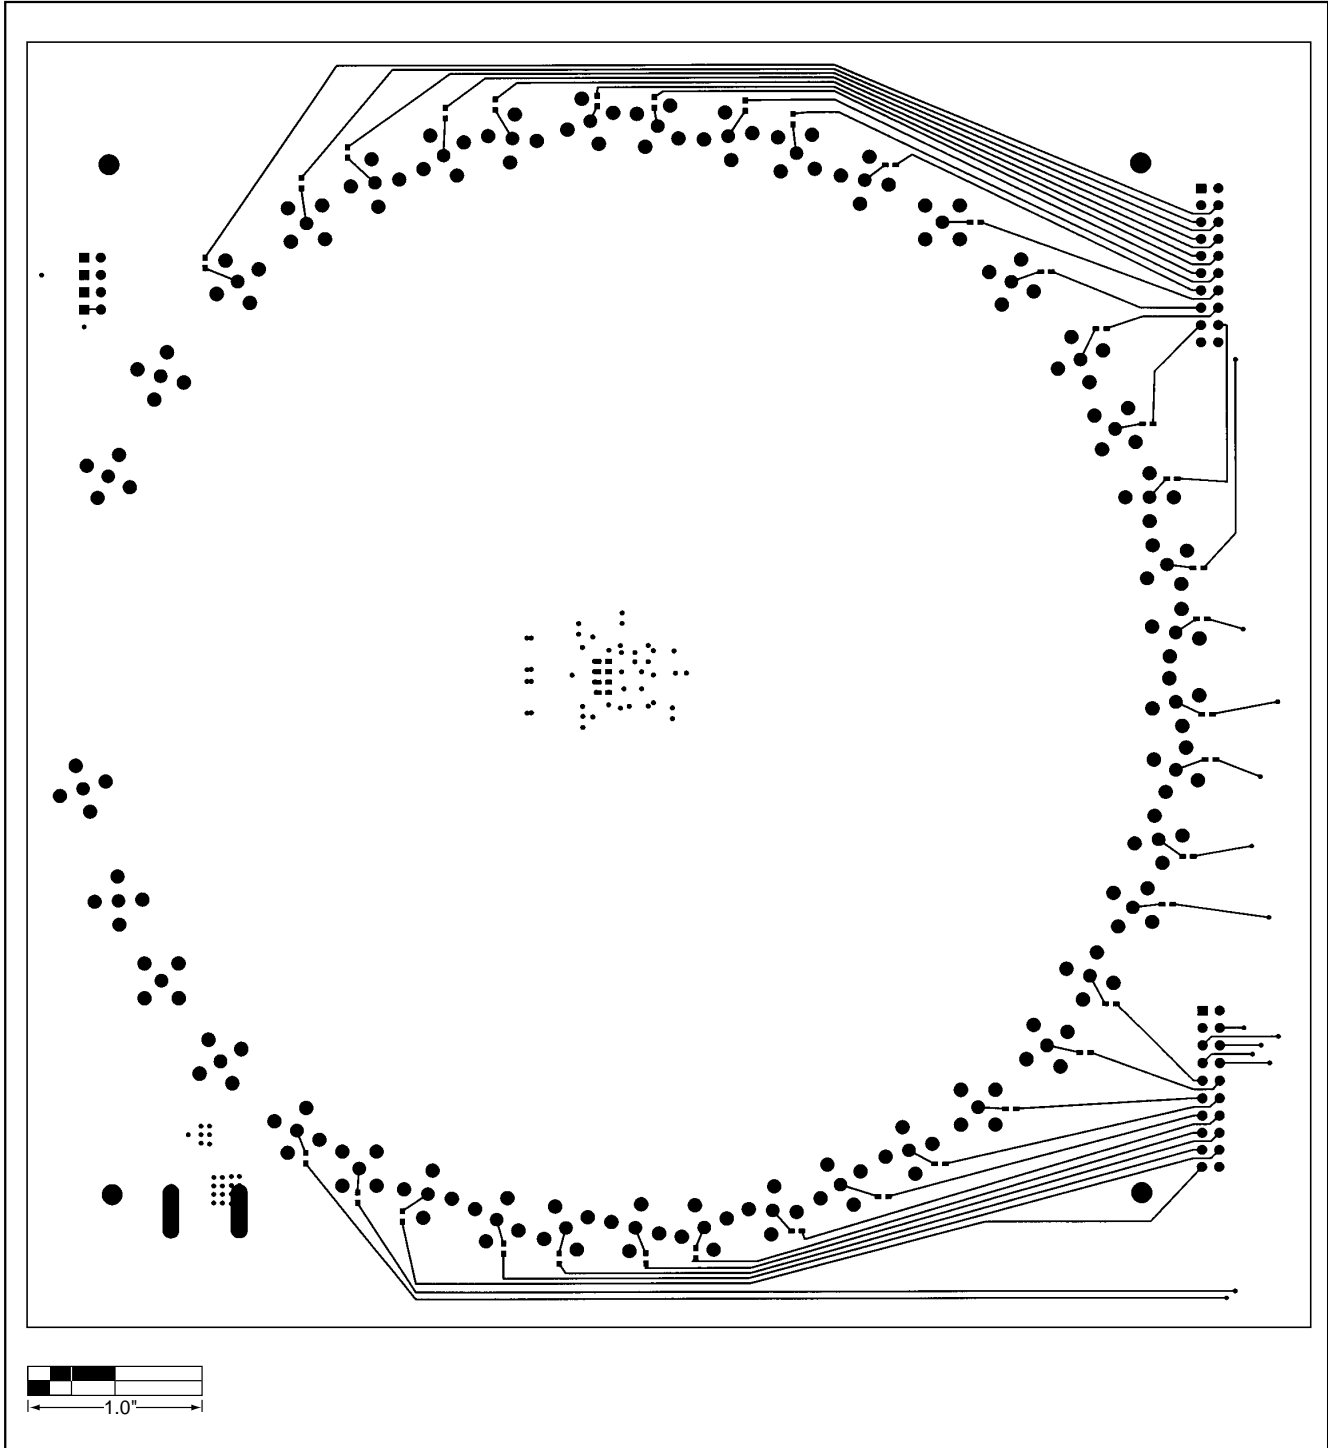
MAX3885 EV Kit PC Board Layout—Solder Side
